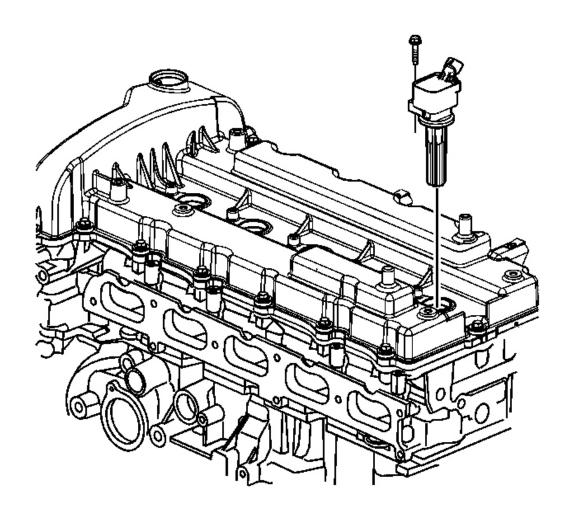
View Of Ignition Control Modules & Bolts Courtesy of GENERAL MOTORS CORP.
